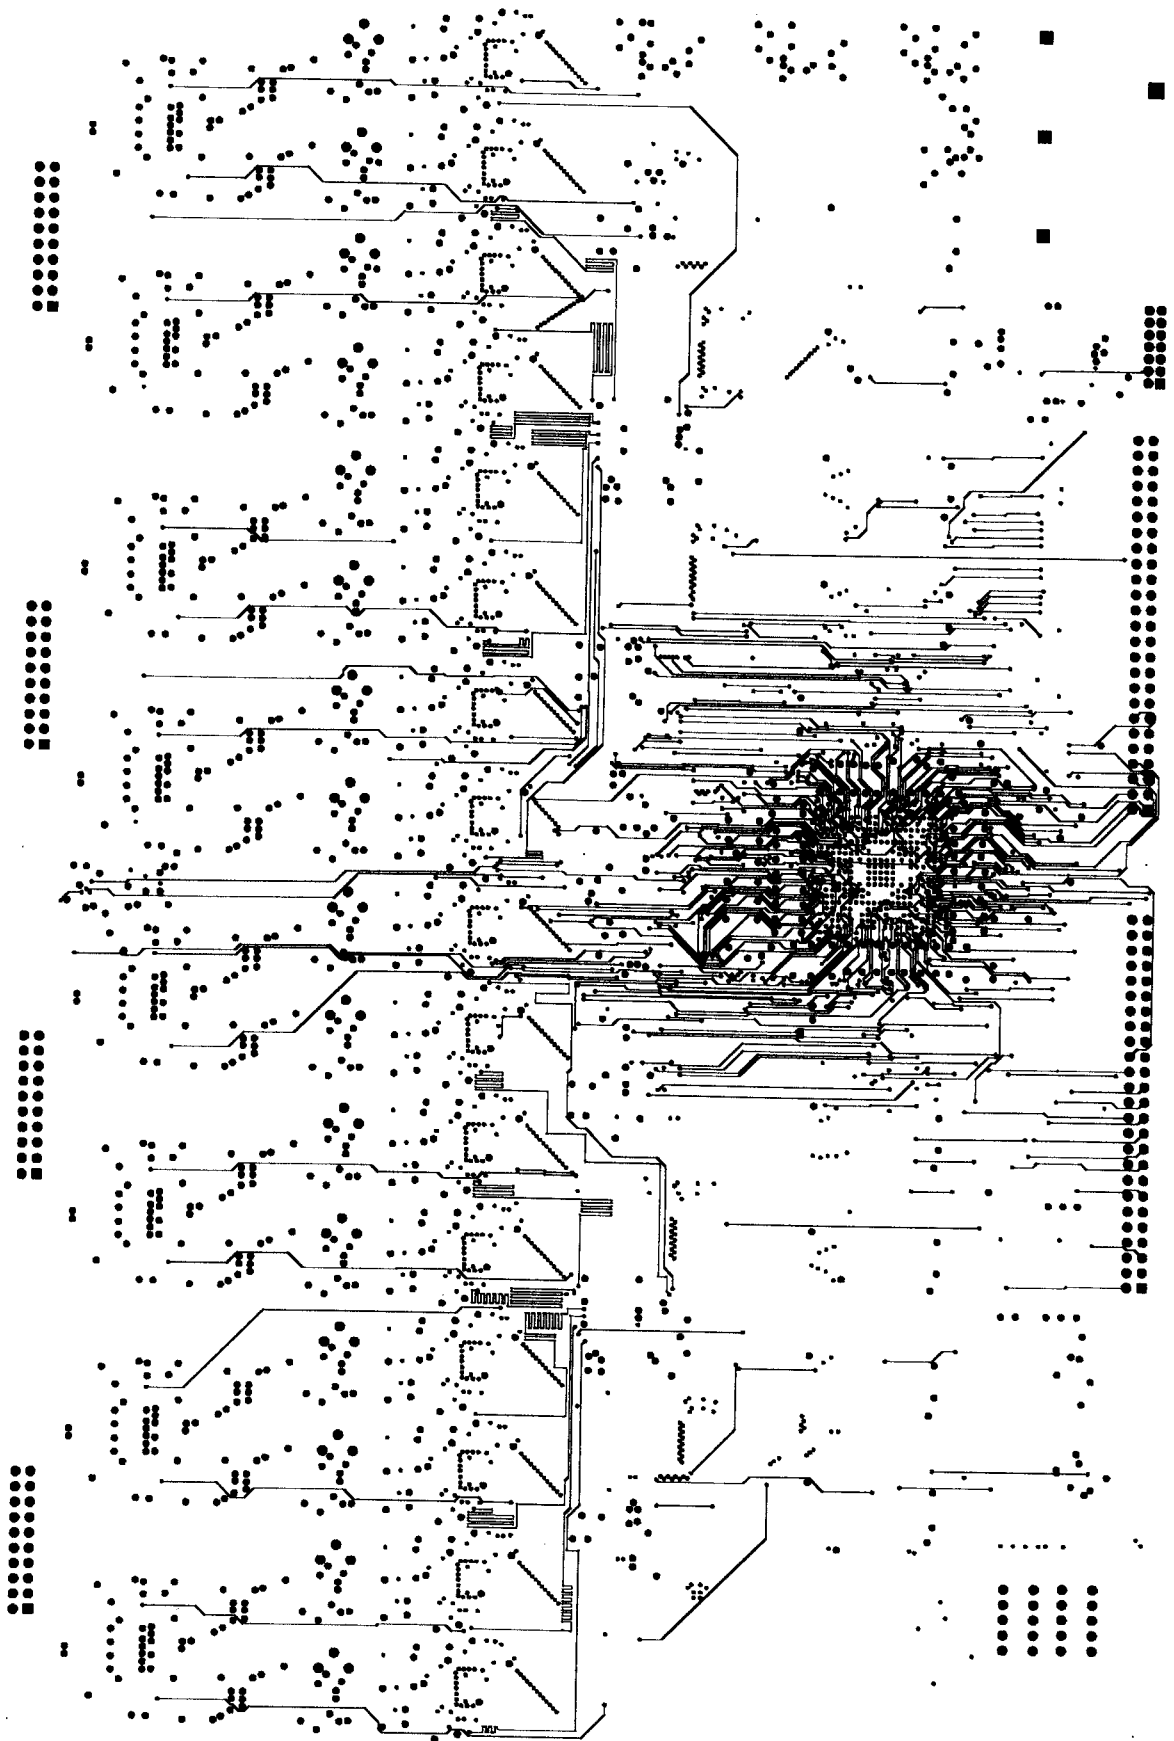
Main Board, PCB Second Routing Layer, Gerber Drawing
